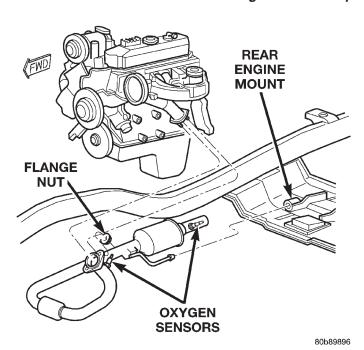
Oxygen Sensor Location—2.5L/4.0L
